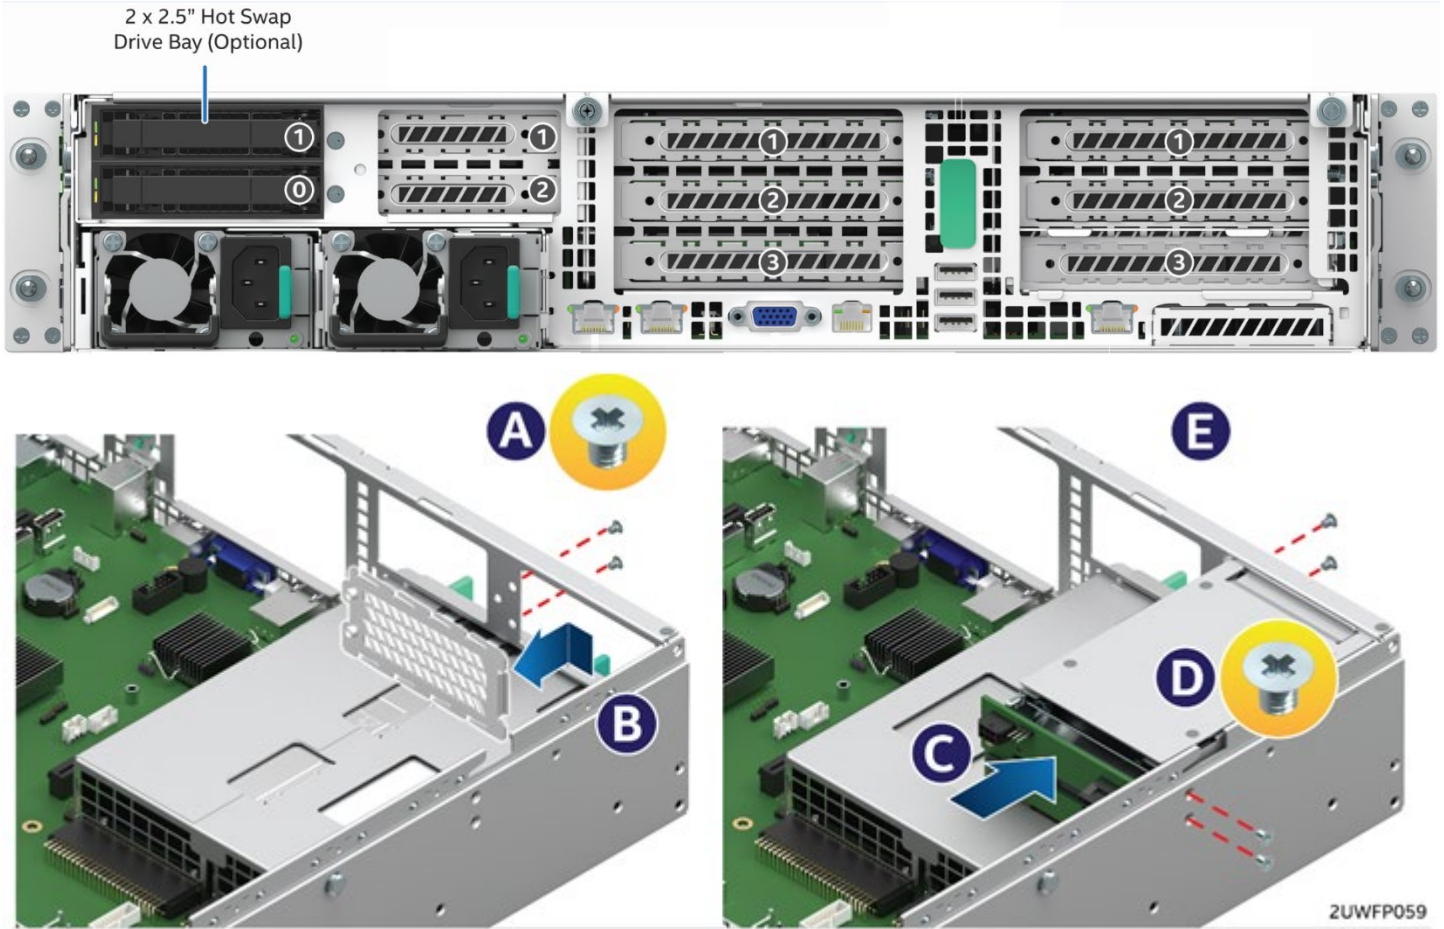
2 x 2.5" Rear Mount Backplane Module Installation
